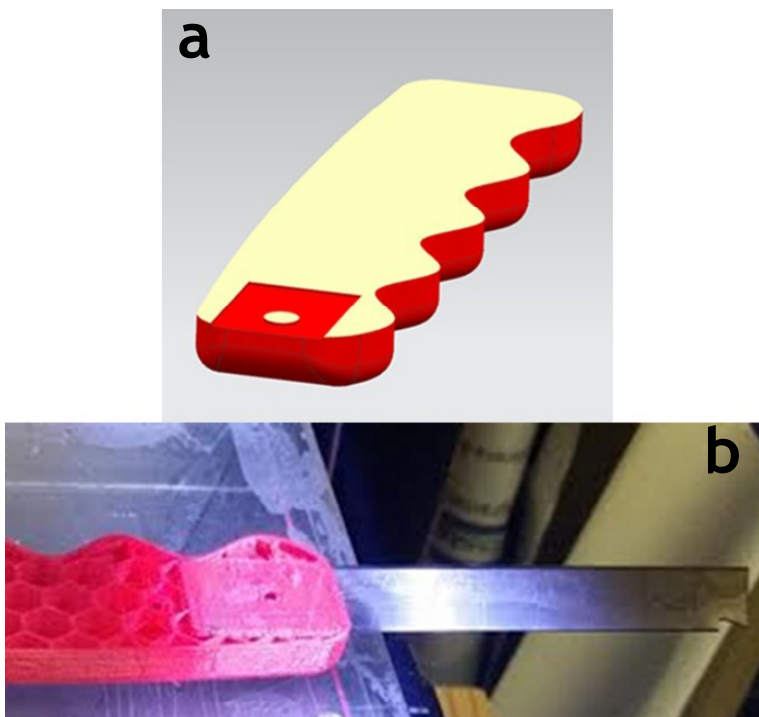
Steel knife with PLA (a) CAD design and (b) prototype.
